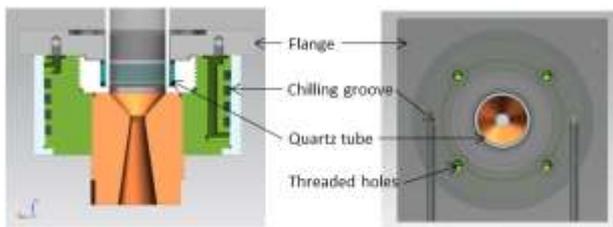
Assembly diagrams of the new nozzle and existing flange. Left: section view; Right: top view
